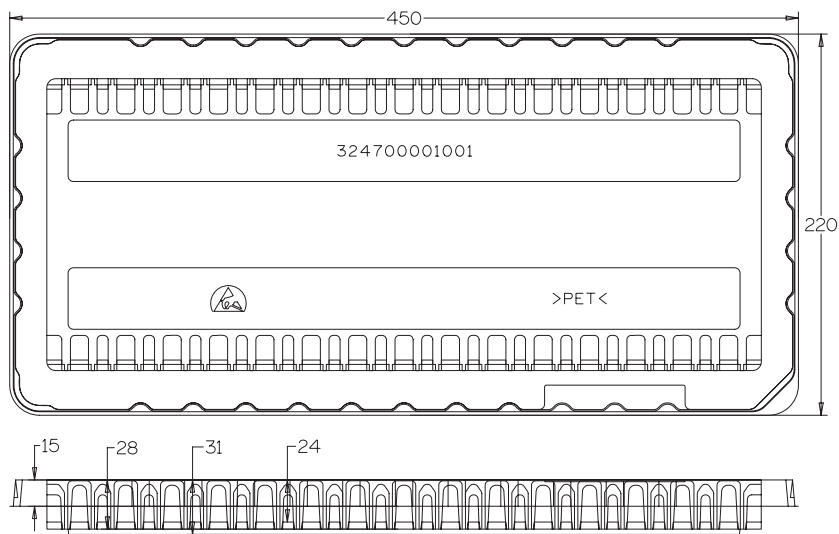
Tray dimensions for L2M0-xxxx004MC3300.
